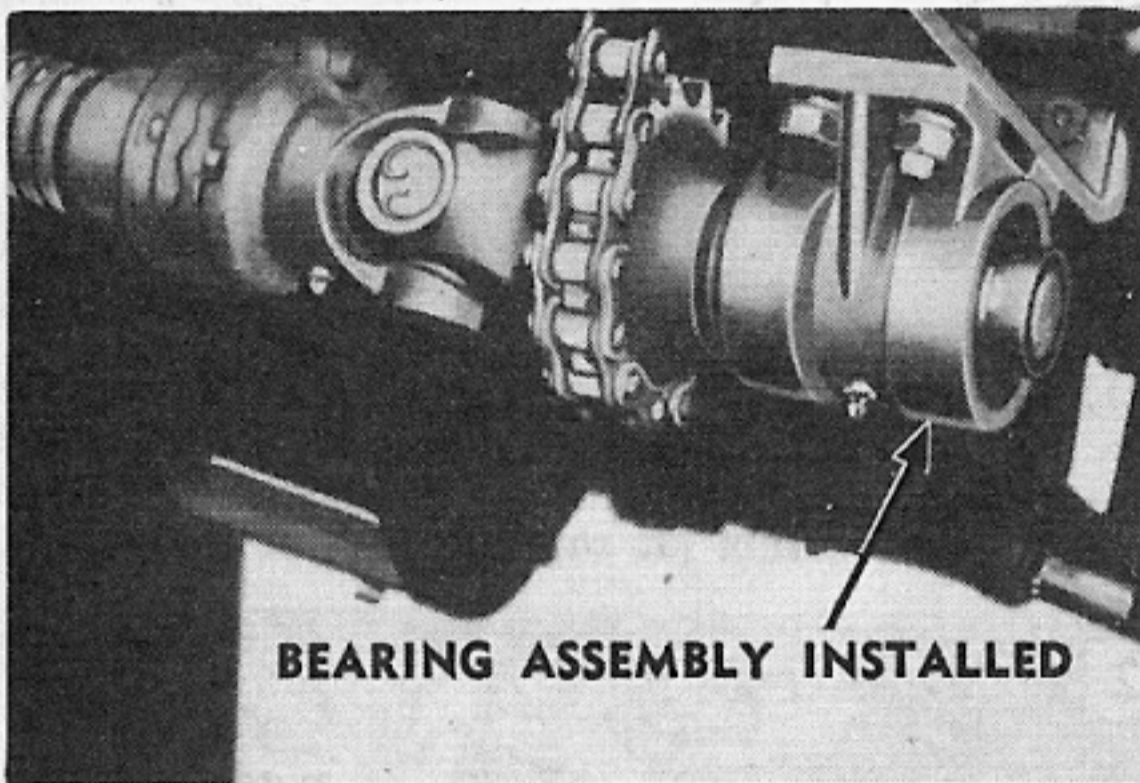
Reinstall bearing assembly (Mfr's Part No. GW-6Y1120Y) flush with support, using original bolts. Line up all sprockets before tightening. Fig. 8—Install drive chain on sprocket, inside the frame, allowing enough play to counteract body travel during operation and to allow for vehicle operation without load. Discard the three extra links from the shortened chain.
